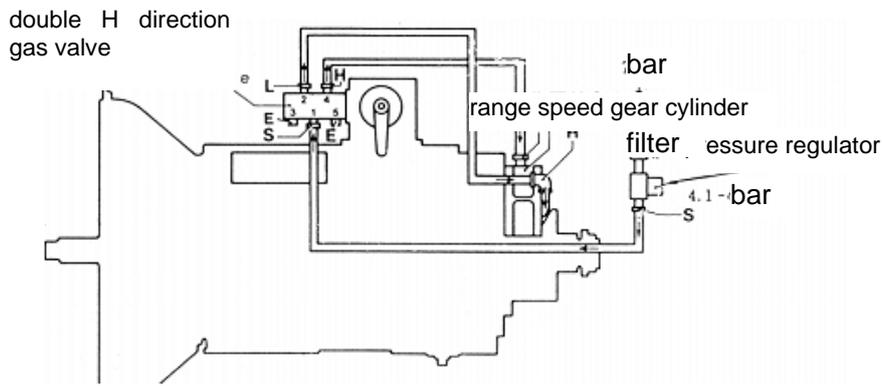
High/Low Gearshift Cylinder of Secondary Transmission
